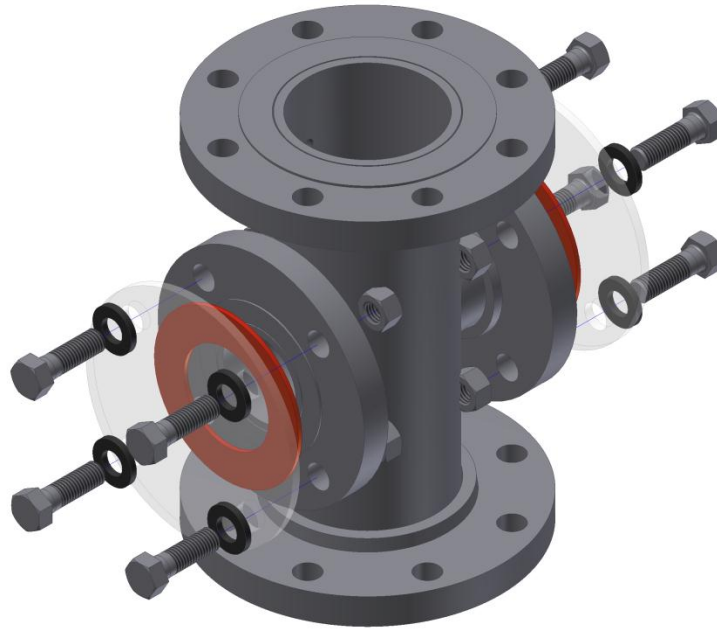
Main stainless steel tank assembly showing polycarbonate viewing ports
